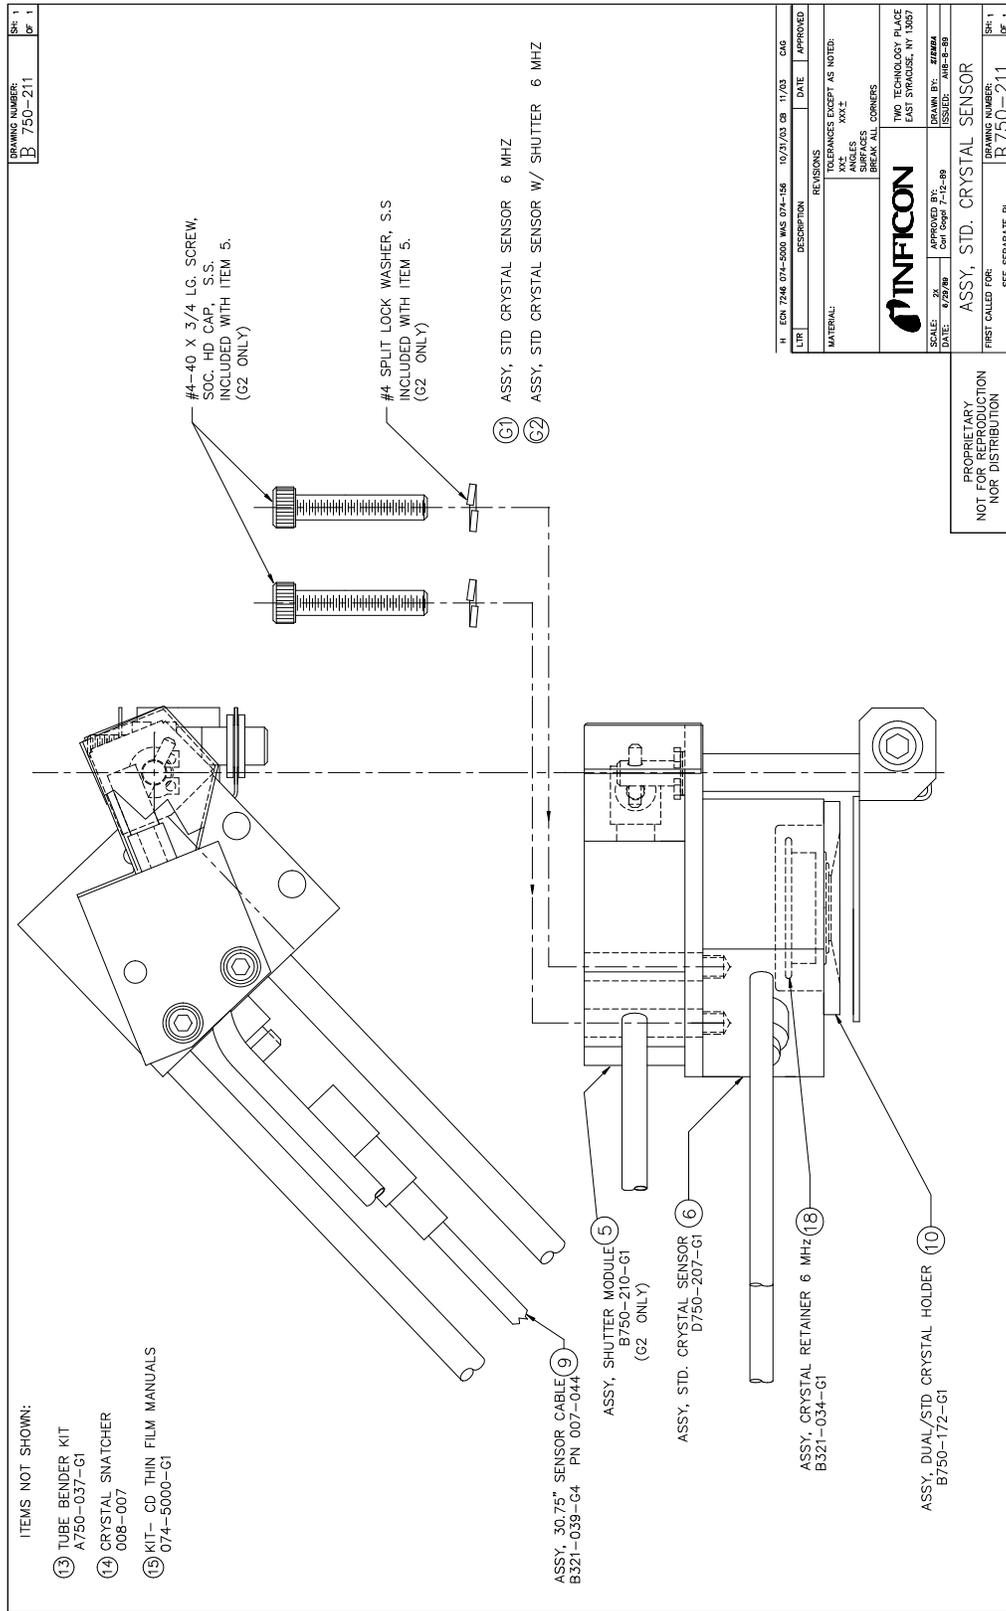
PN 750-211-GX standard crystal sensor assembly
